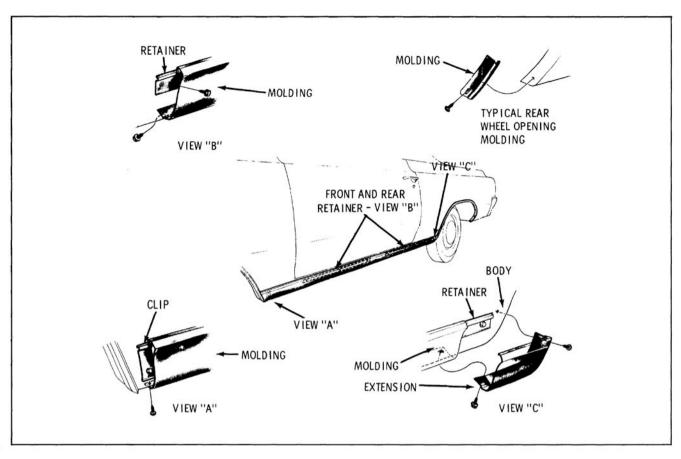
Rocker Panel and Rear Wheel Opening Molding
